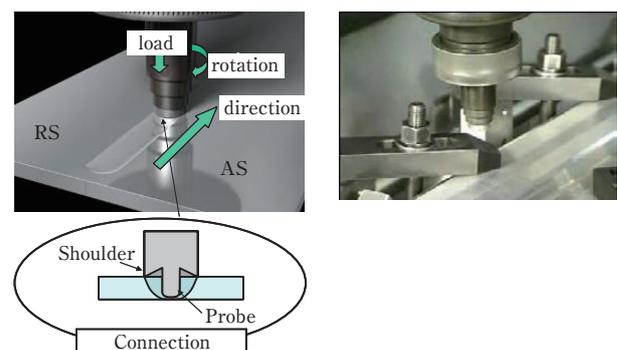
Illustration of the friction stir welding (FSW).
